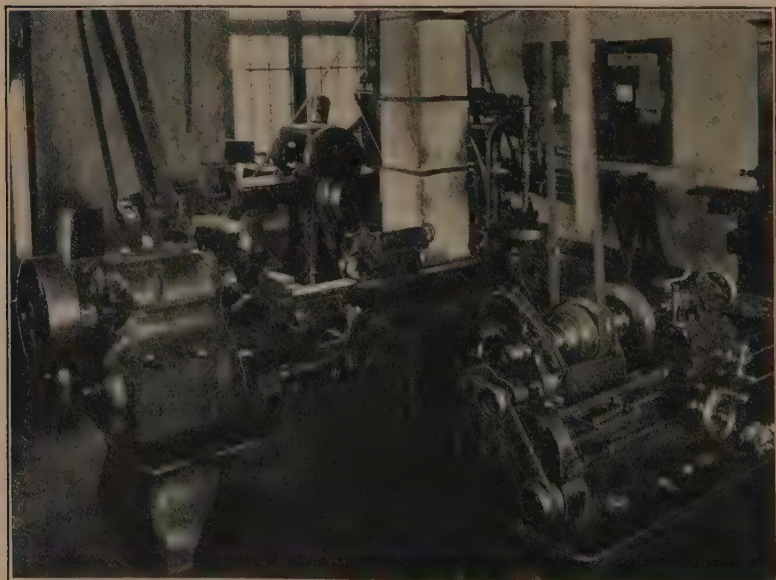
Machine shops and like equipment are provided for boys in the modern school
